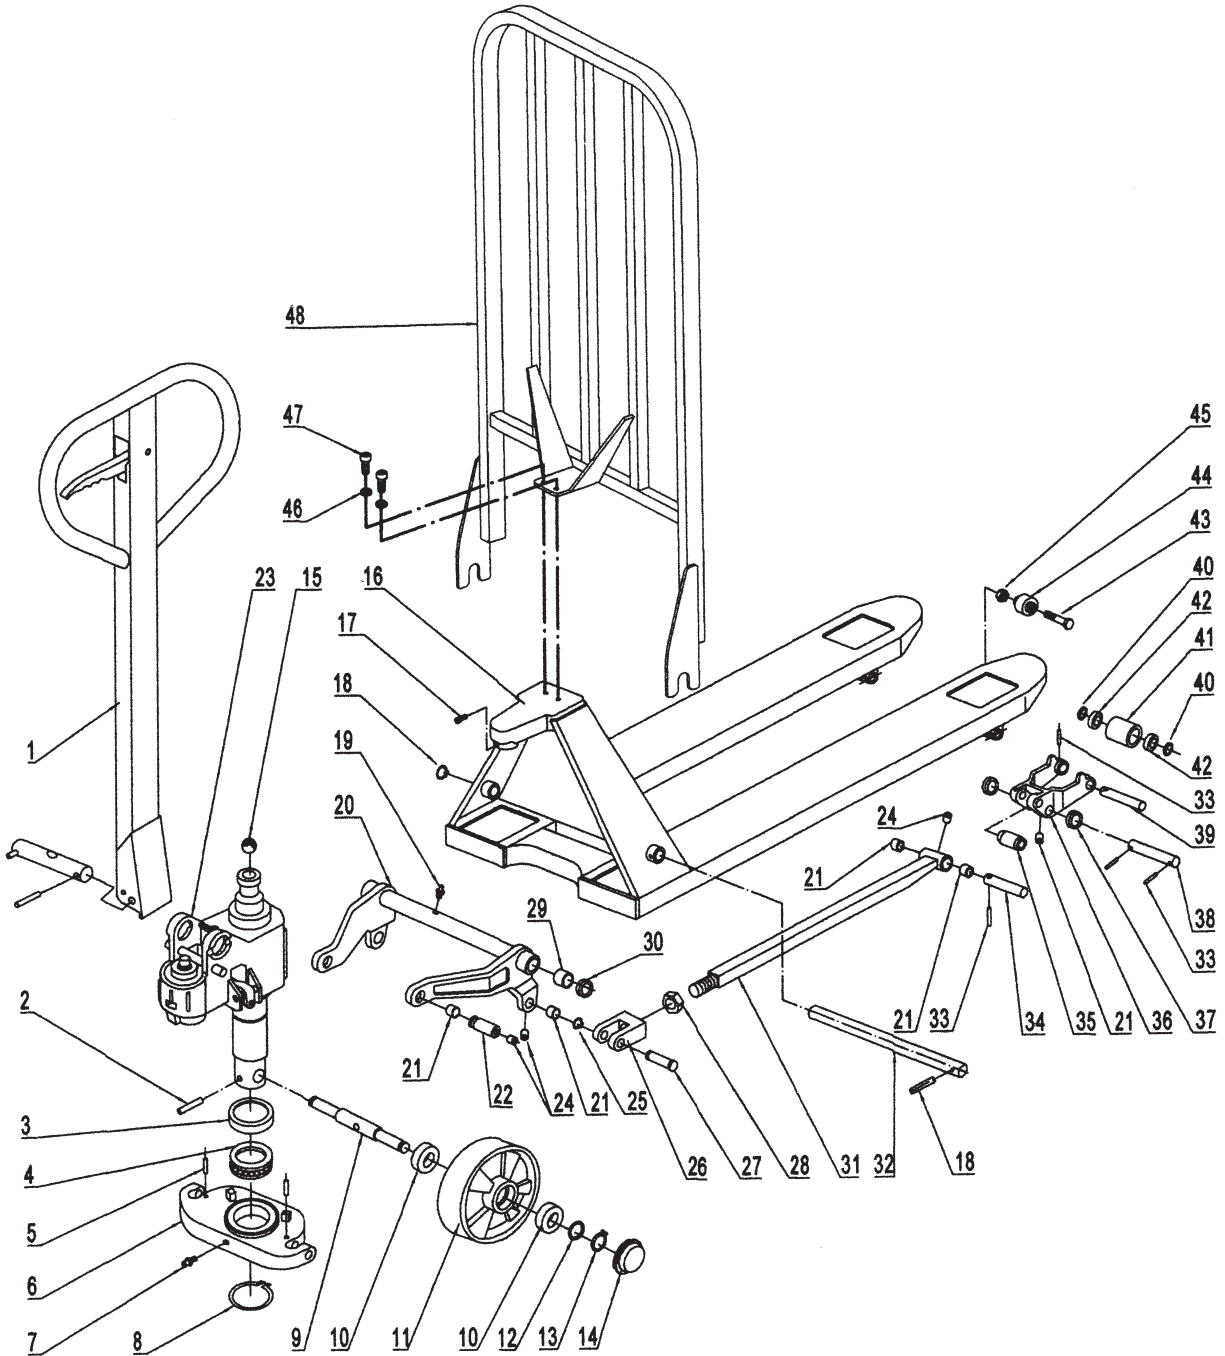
Repair Parts Illustration for Hydraulic Hand Pallet Trucks
